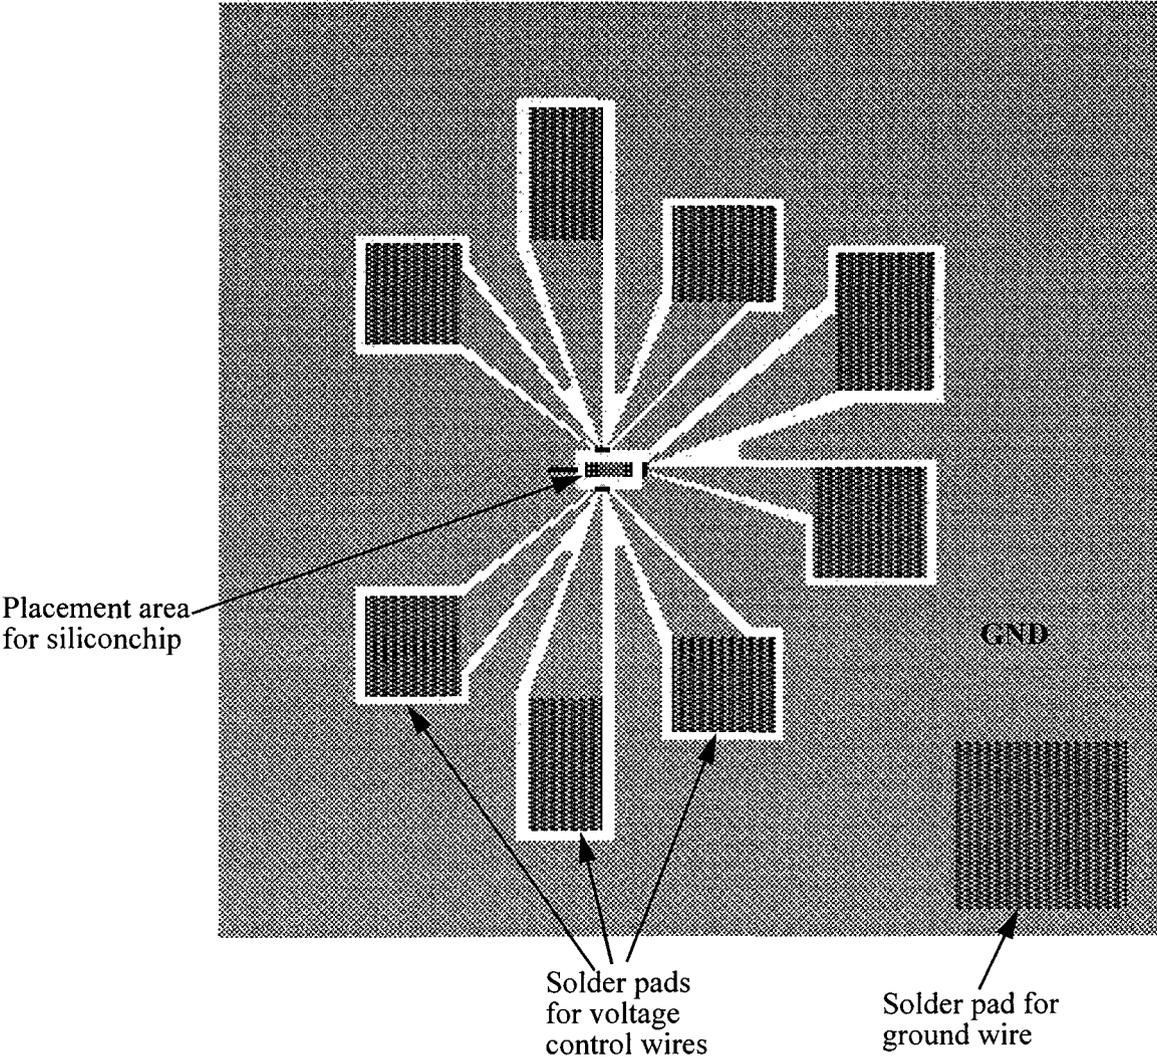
Layout of the PCB as created in ADS sent to SpeedyPCB
